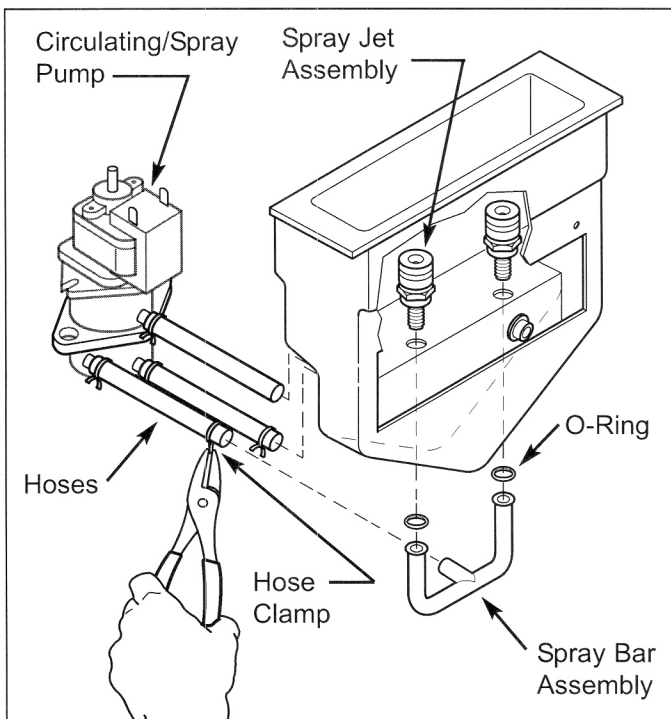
O-Ring, Spray Bar and Hose Removal
